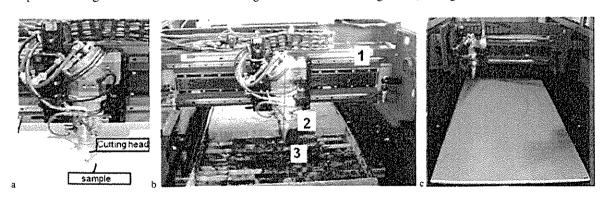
(a) cutting head (b) Trumpf TLF 2700 cut station (1=laser beam, 2=cutting head, 3=cut table) (c) cut process of the cardboard sheet.
